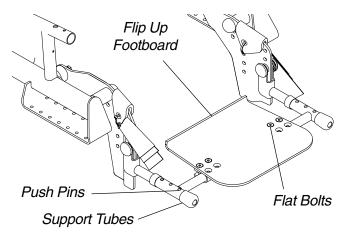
ADJUSTING FLIP-UP REMOVABLE FOOTBOARD
